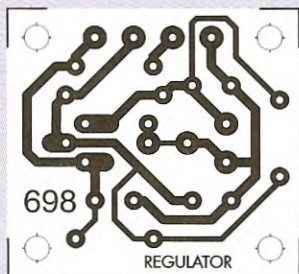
this is the full-size etching pattern for the PC board. Check your board for defects before mounting any of the parts.
